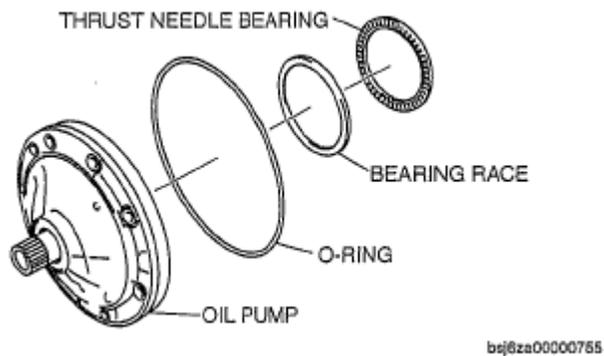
Identifying O-Ring, Thrust Needle Bearing And Bearing Race On Oil Pump
